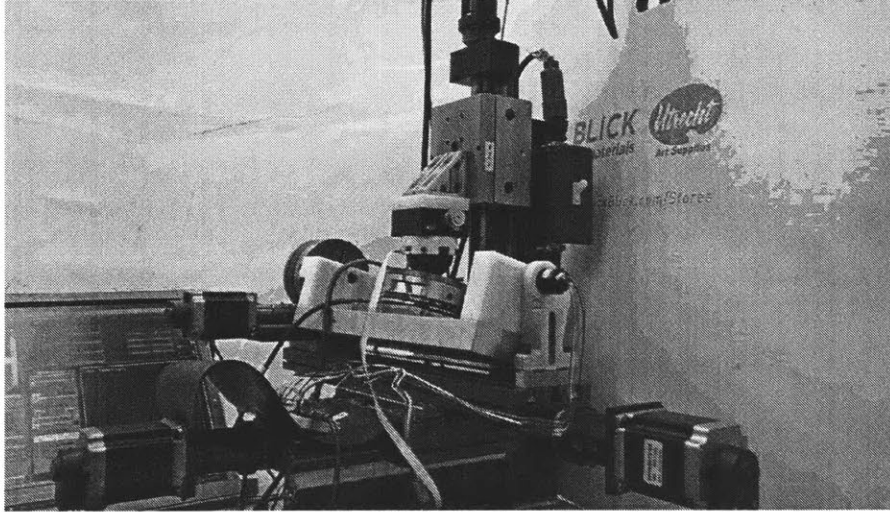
Experimental setup with CNC mill, footpad attached to CNC spindle mount, and a force sensor on the trunnion table.
